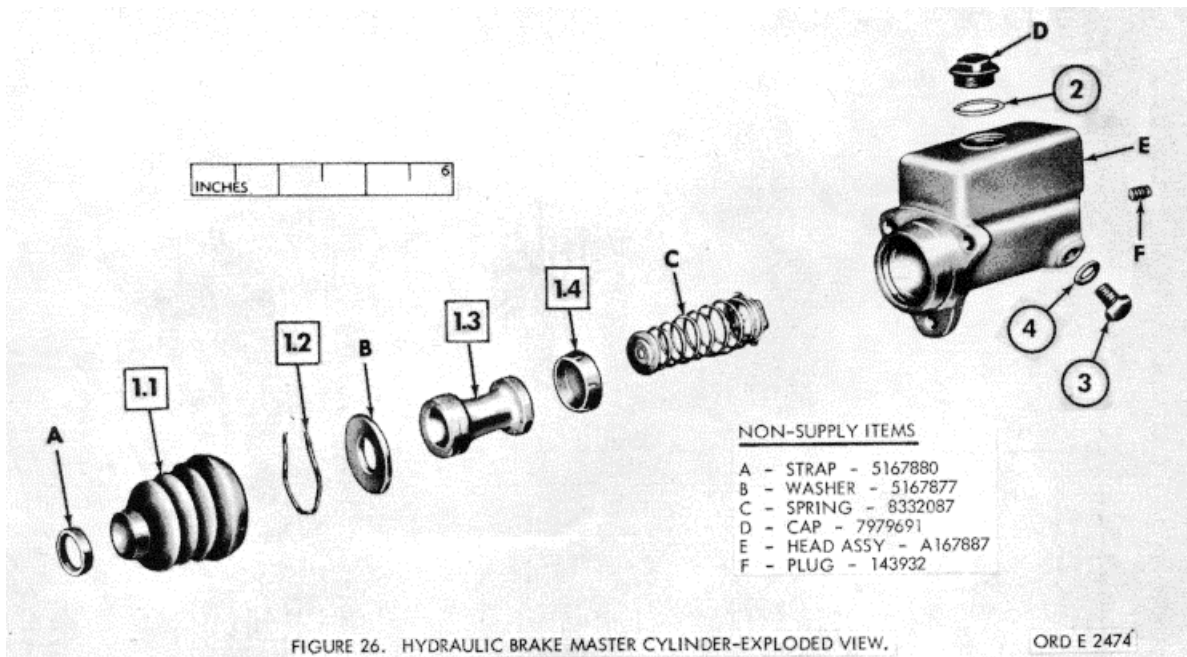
HYDRAULIC BRAKE MASTER CYLINDER-EXPLODED VIEW
